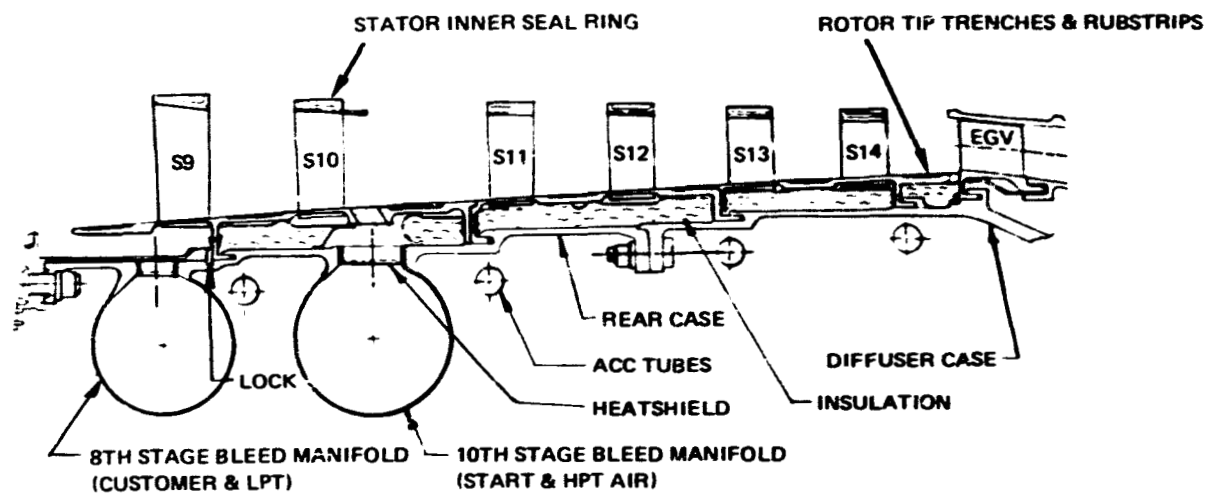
High-Pressure Compressor. Rear case assembly incorporates active clearance control features.
